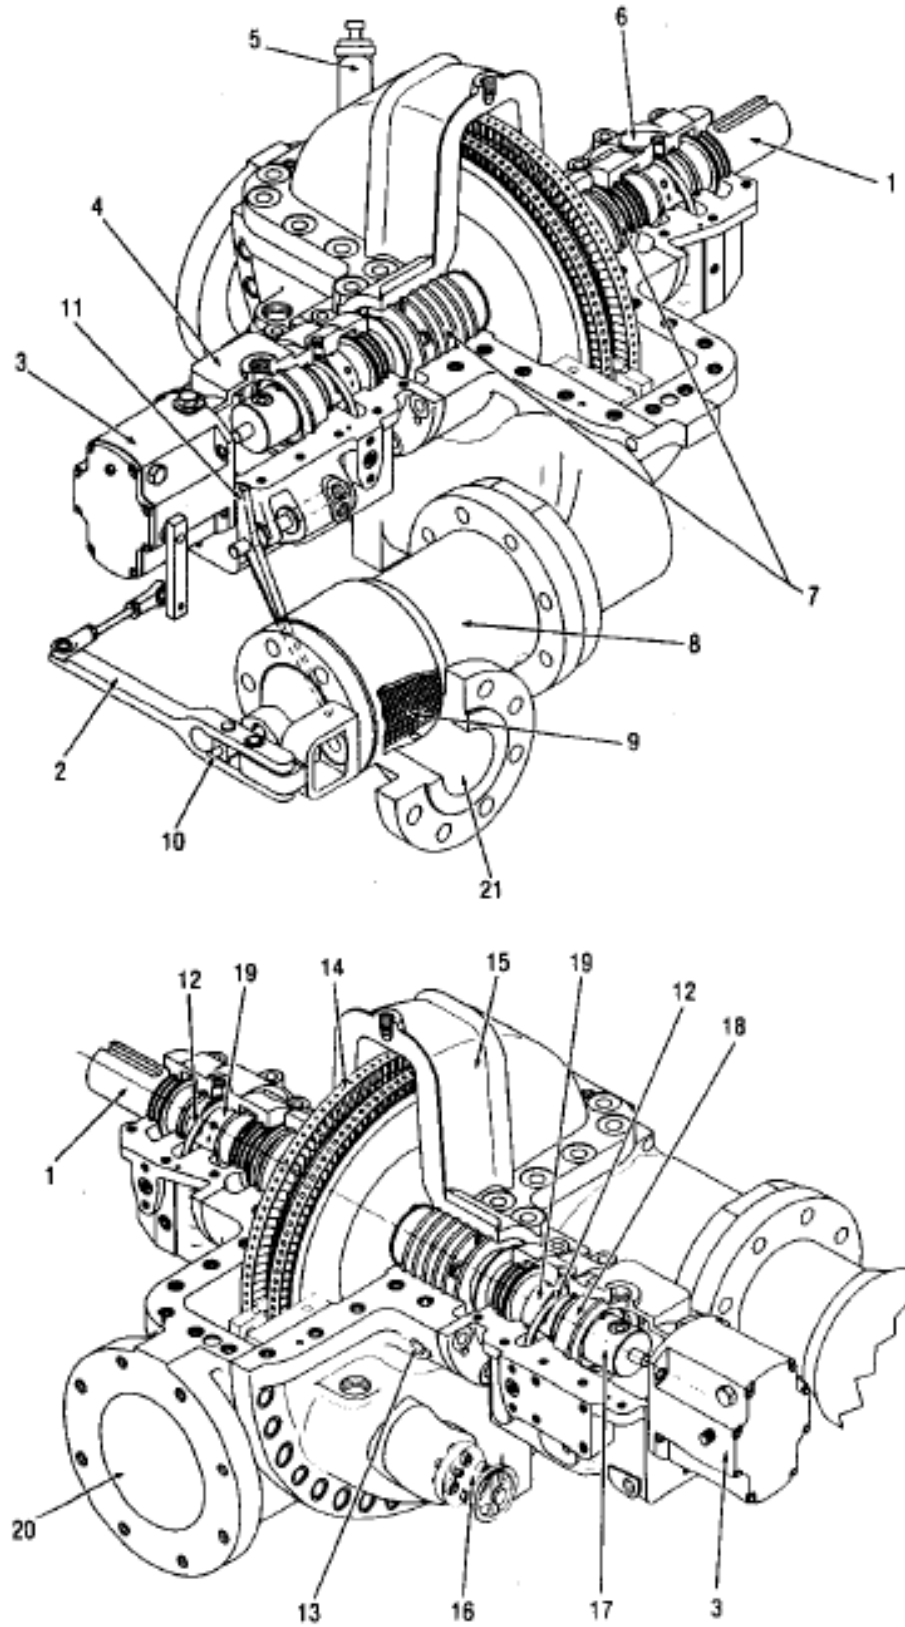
Dresser-Rand SST, General View, Steam and Exhaust Ends
